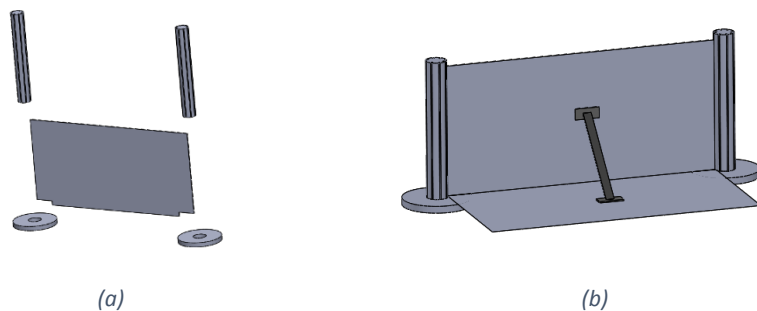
(a) Show an exploded view of the Concept 1 without the canvas. (b) Shows a fully deployed module of Concept 1.
